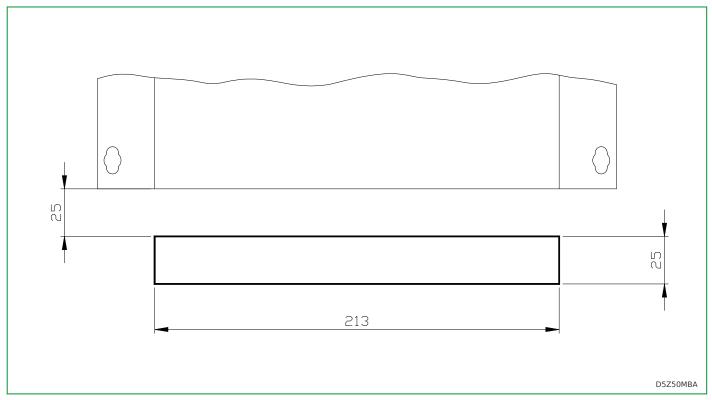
Opening (cutout) for running the connecting leads to an 40 TE surface-mounted case.
